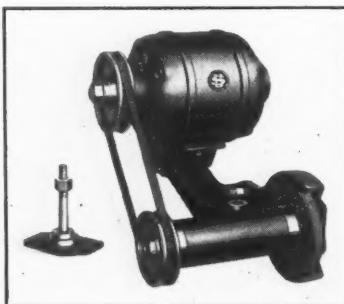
Lathe Grinder for Use on Reamers, Dies, and Similar Parts
